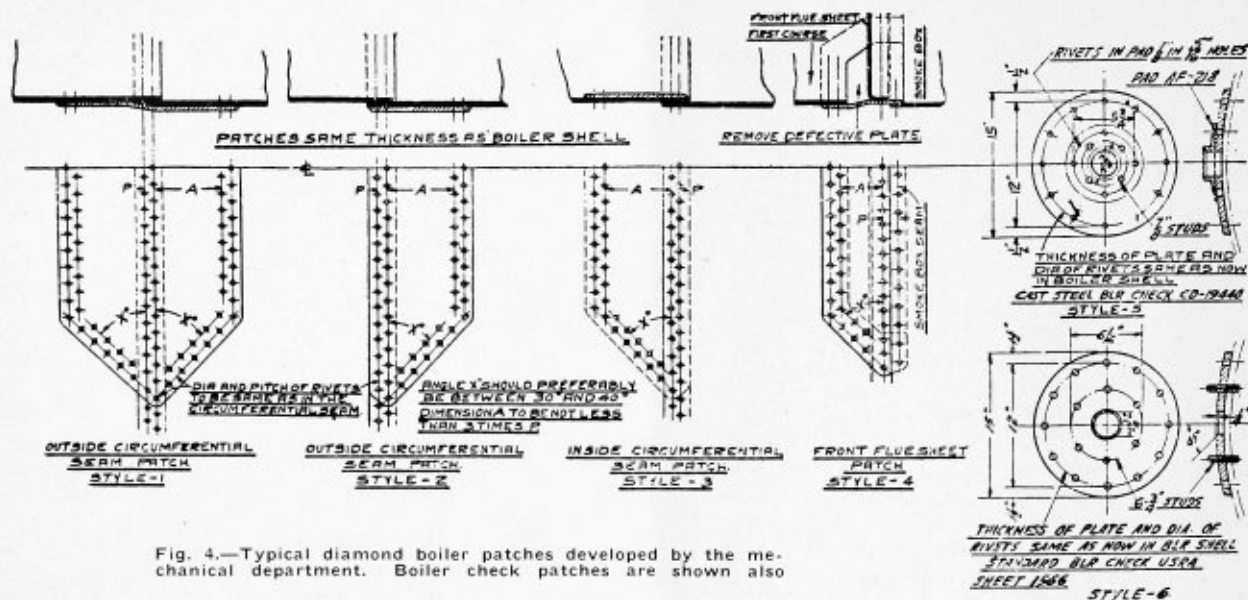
Typical diamond boiler patches developed by the mechanical department. Boiler check patches are shown also
